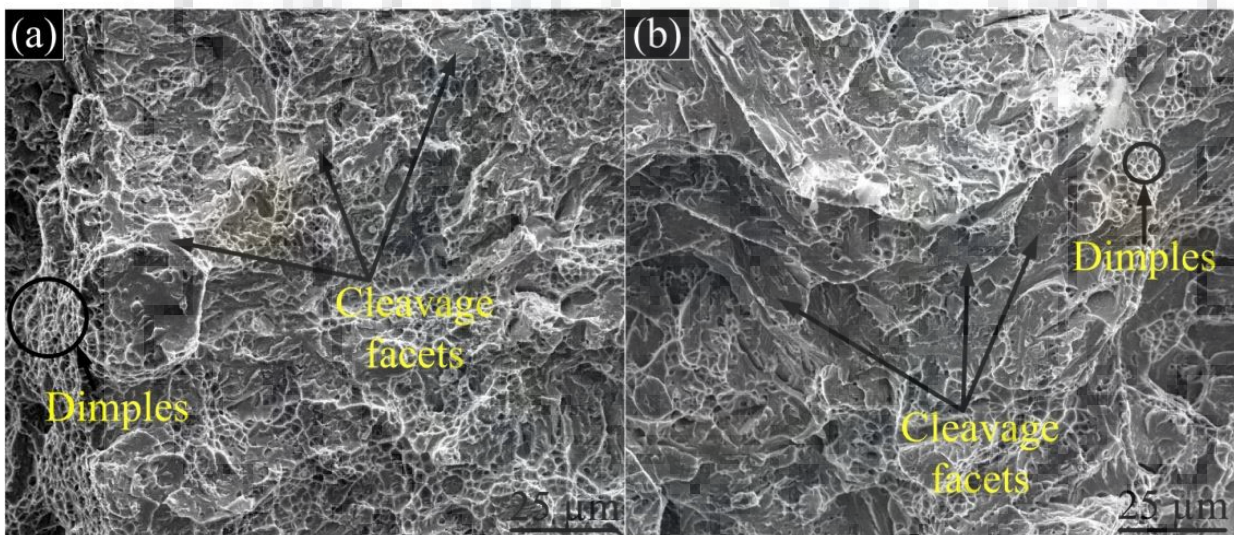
Fracture surface morphology of longitudinal tensile specimen (a) using E911 filler (b) using P92 filler
